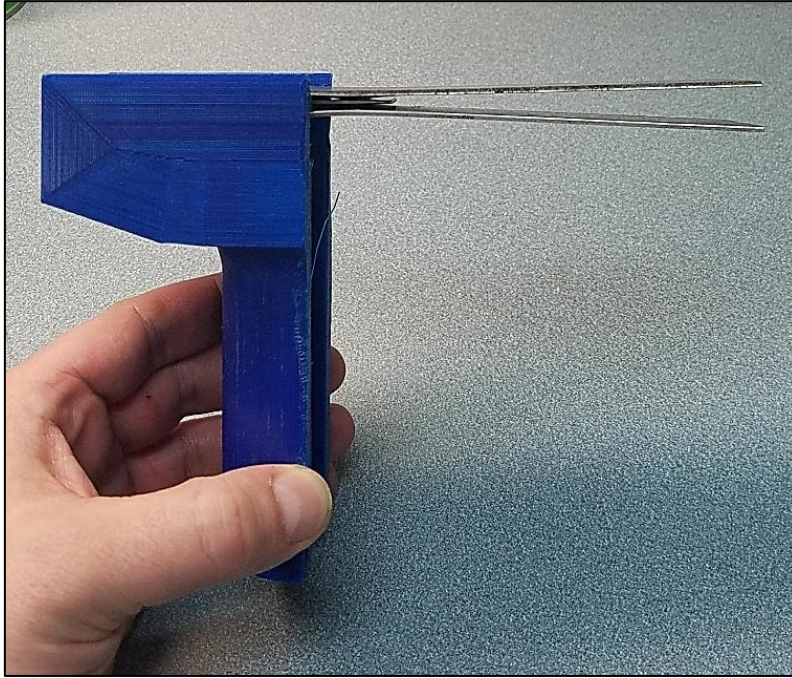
Three stack weld setup utilized during Weld Set #7
